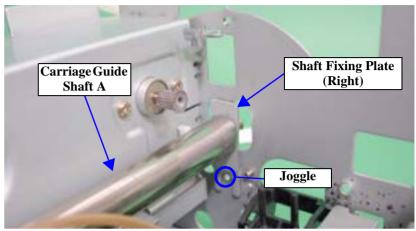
Removing the Shaft Fixing Plate (Right)
